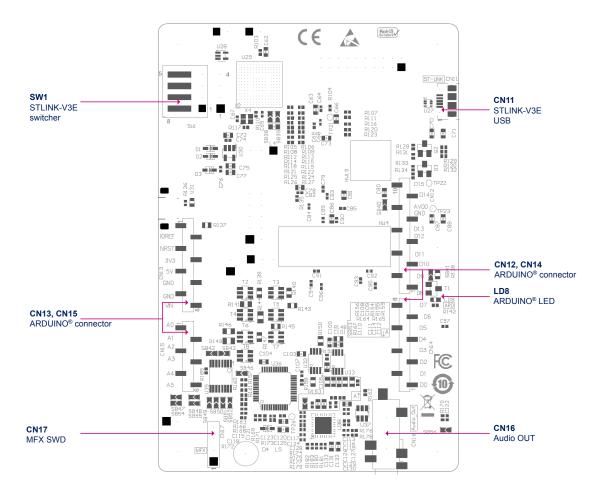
STM32L4P5G-DK PCB layout (Bottom view)
